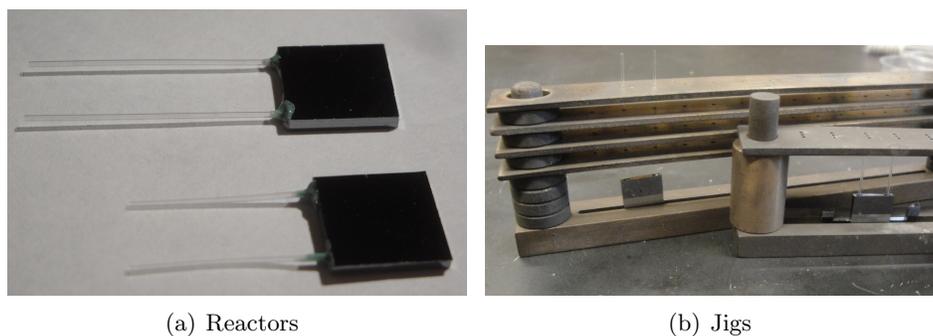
New (rear) and old (front) brazing jigs and reactors brazed in each jig. The new jig produces longer and straighter tubes by supporting the tubes at multiple points.
